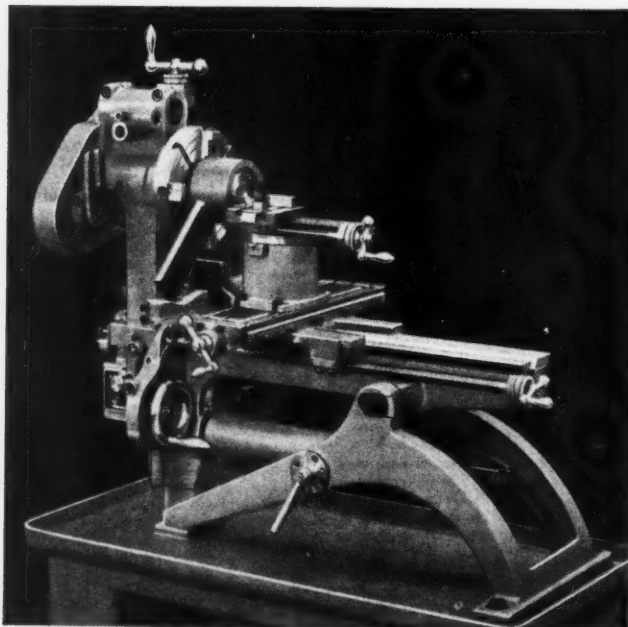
Universal Machine Set up for Facing Operation on a Forging
